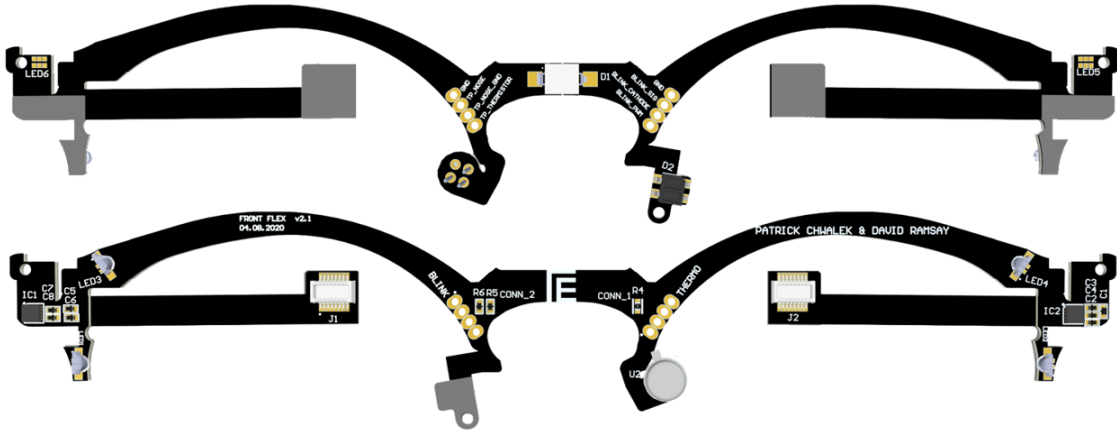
Design of Flexible Circuit Board (Top is Front-facing, Bottom is Rear)
